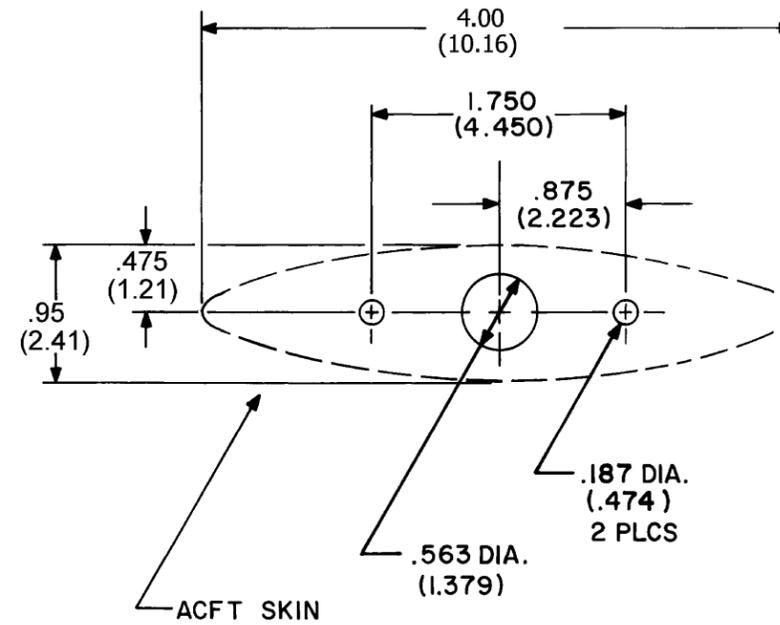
KN 62/62A/64 INSTALLATION DRAWING
